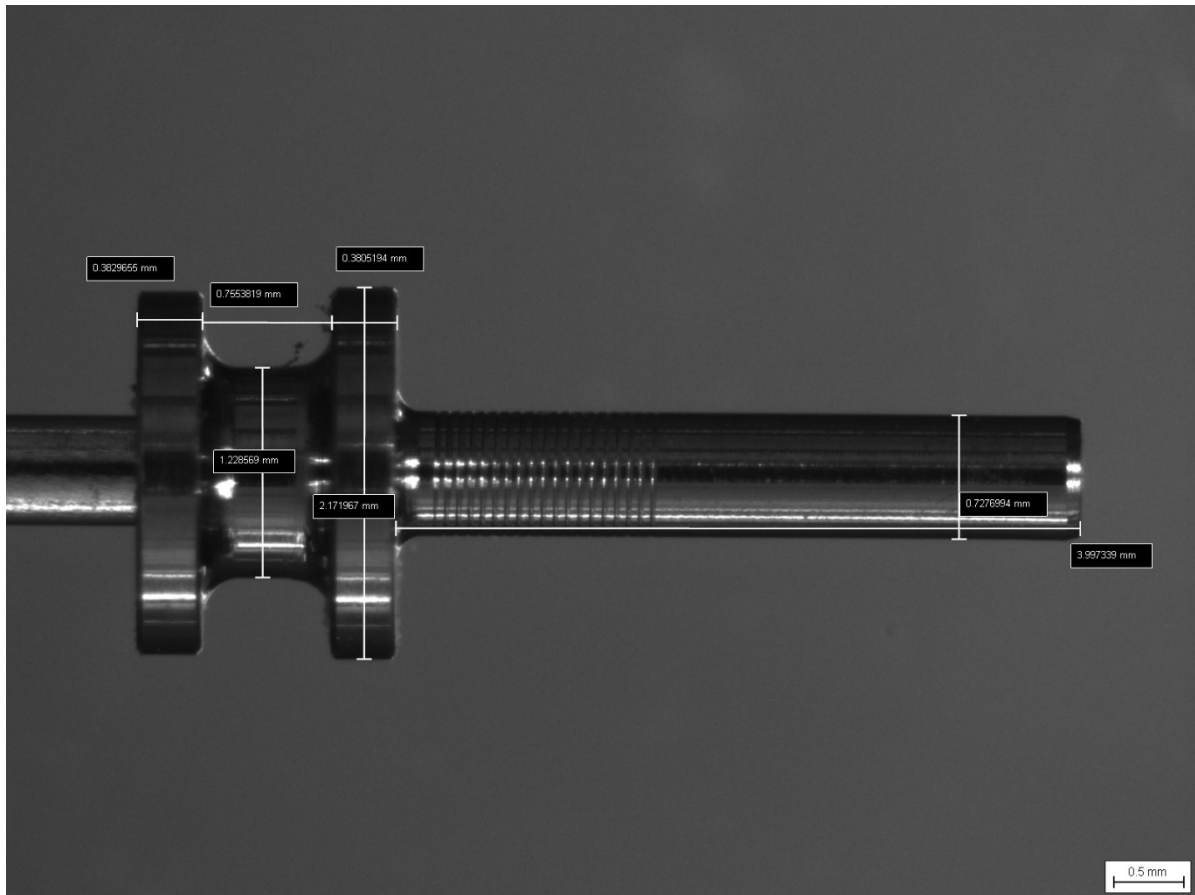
Port dimensions, measured from the picture, tube outer diameter (0,728 mm)(Hošek, Modified)
